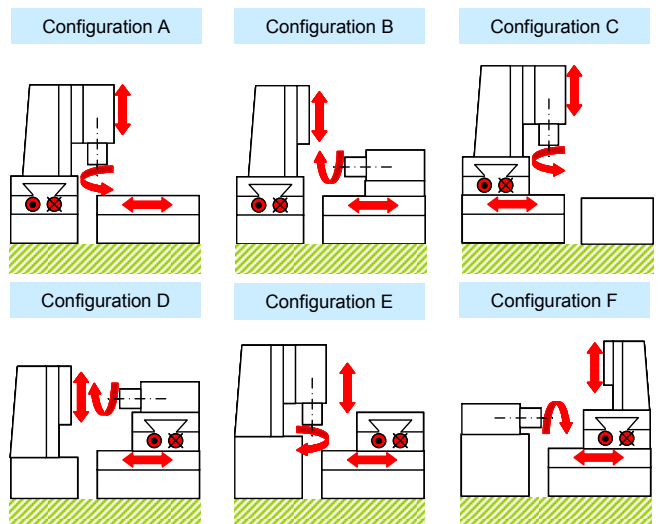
Generated configurations of meso-scale machine tool (mMT)
